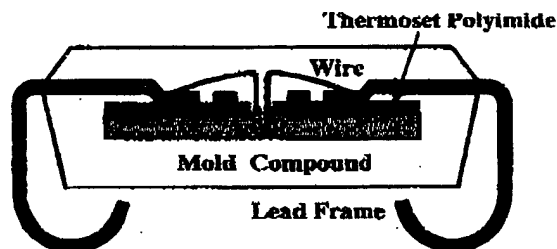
Small outline J-lead (SOJ) package with tapeless LOC design.
